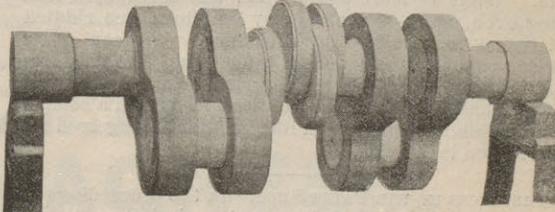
CRANK AXLE—L. & N. W. RY.
